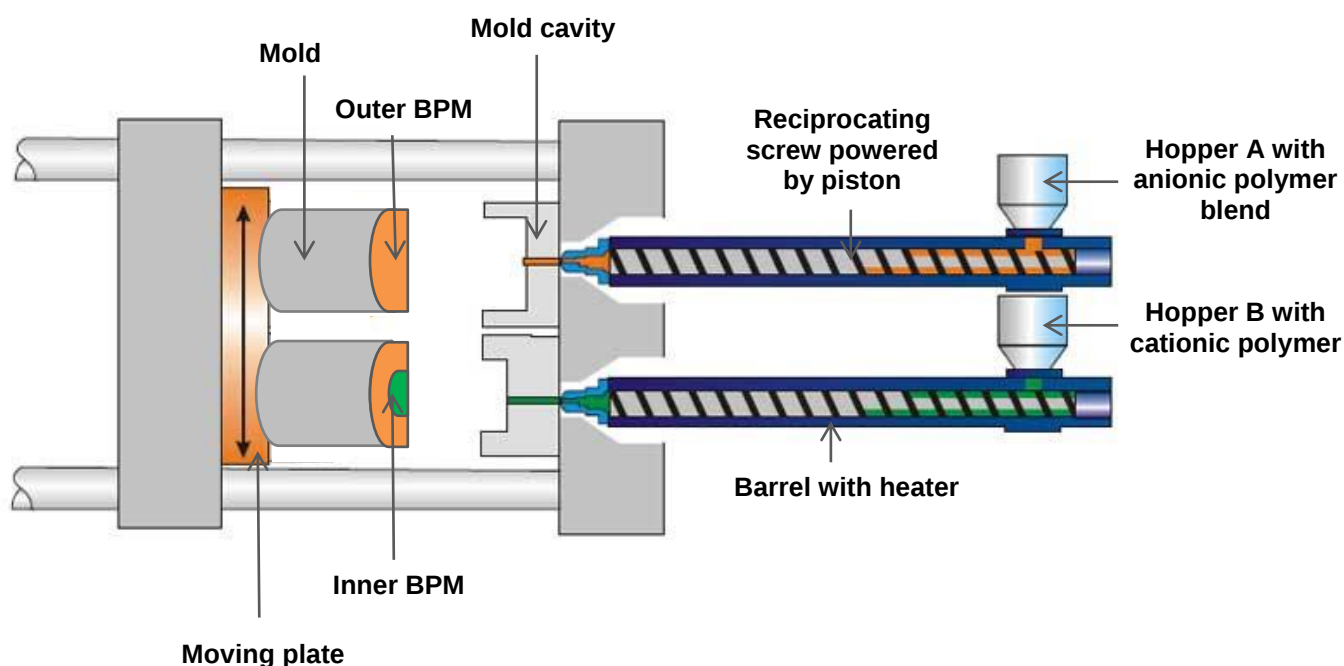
Proposed configuration of machinery dual-injection molding (Adapted from: Dakumar machinery, www.dakumar.com/bi-injection-moulding-machine.htm)
